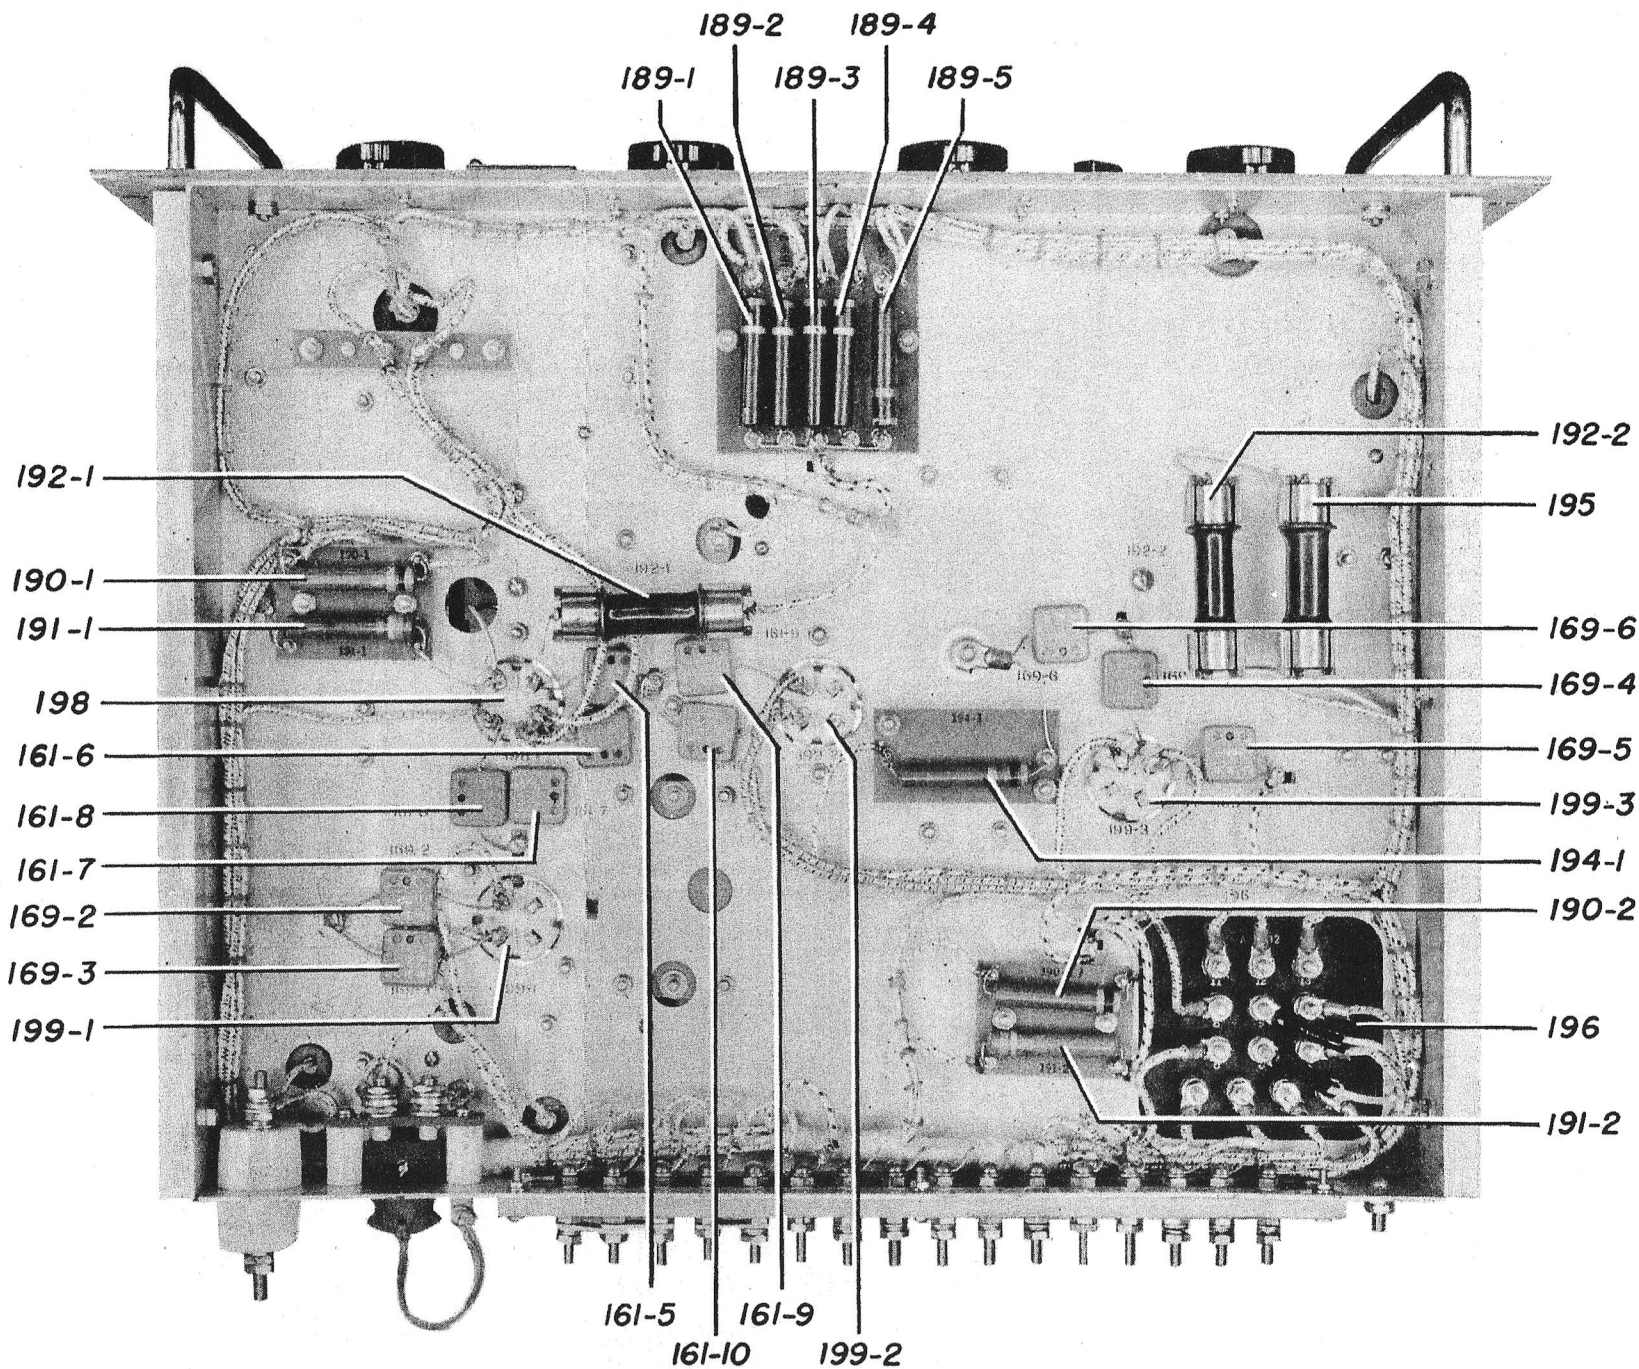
Oscillator Panel PN-9-A, Bottom View
